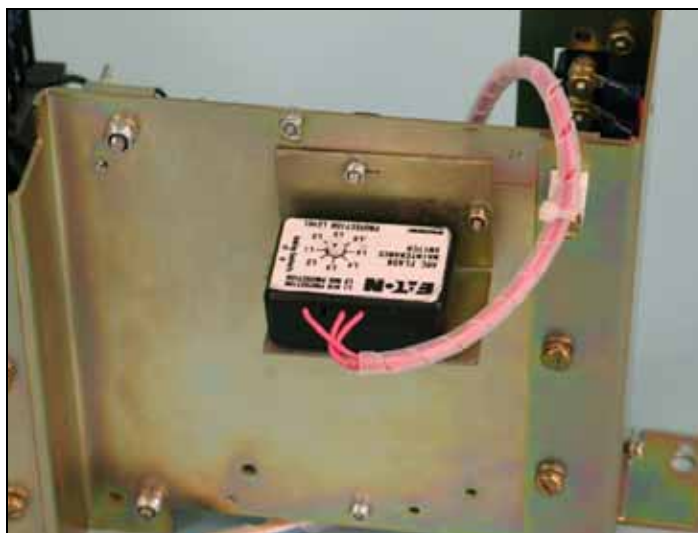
RSM Assembly Installed on the Trip Unit Mounting Frame.
